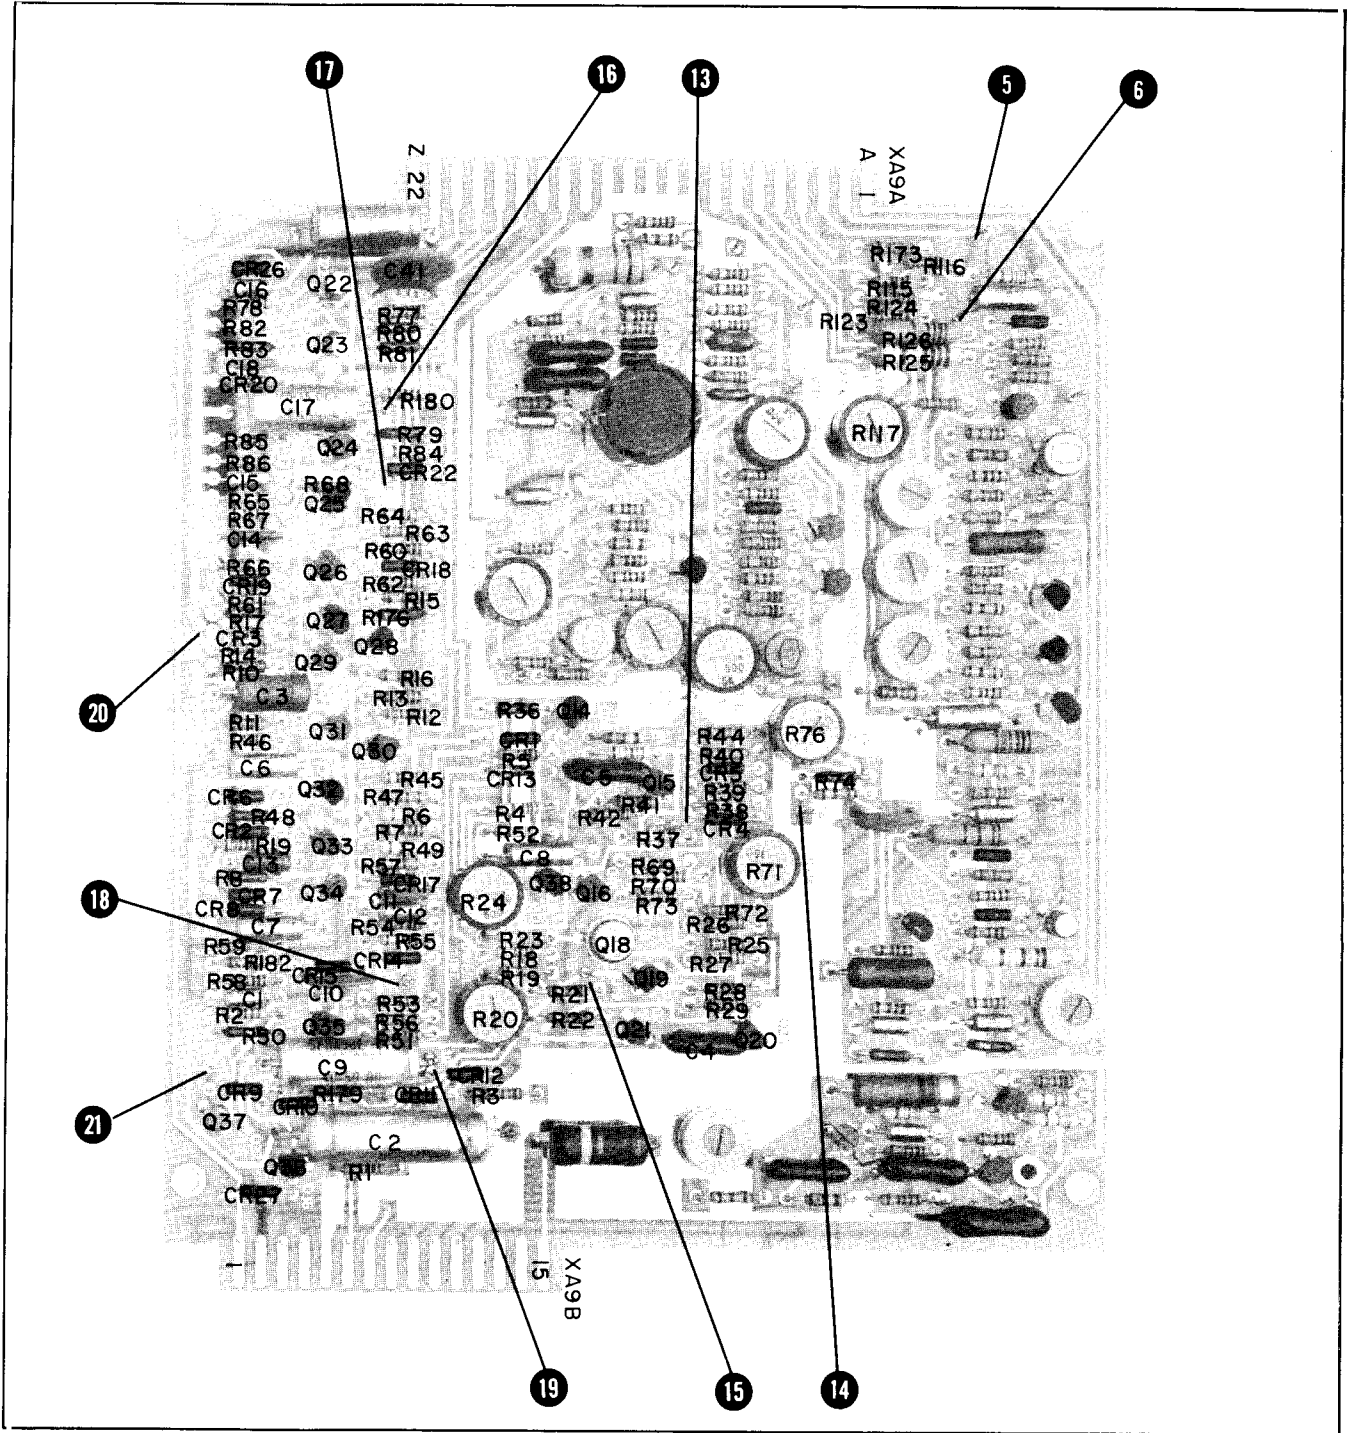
Component Identification, Sweep Generator, P/O A9
